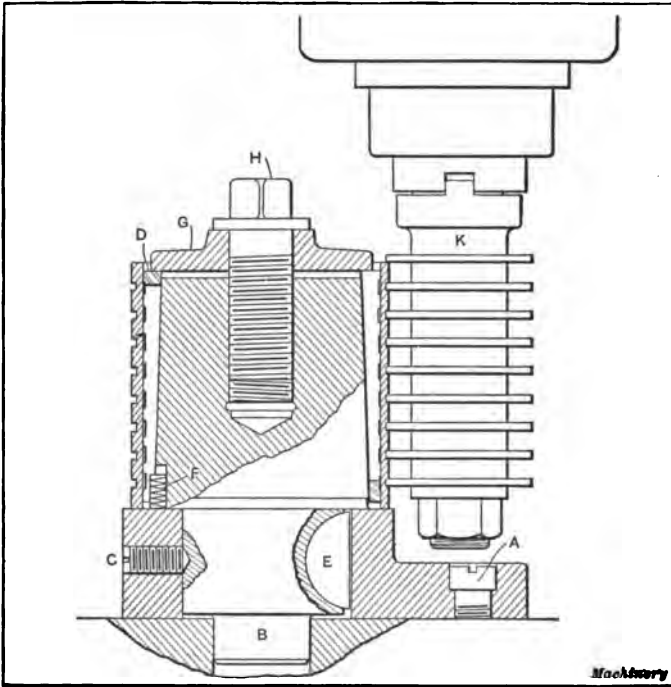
Expanding Arbor for Holding Casting while Gang-sawing Packing Rings
